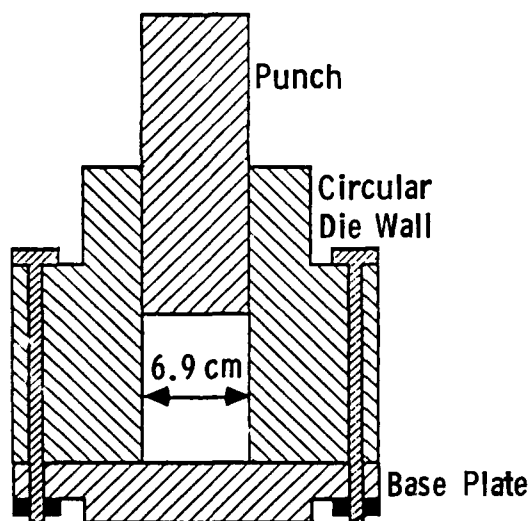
Steel die used for squeeze casting of fiber reinforced metal matrix composites.
